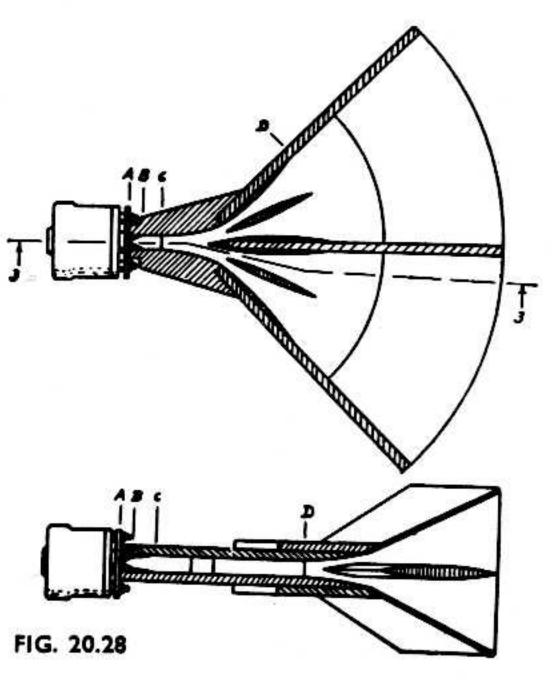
Klipsch high frequency horn loudspeaker: Upper view—sectional view from top; lower view—sectional view from the side through line 3-3 of upper view. (Ref. 33).
